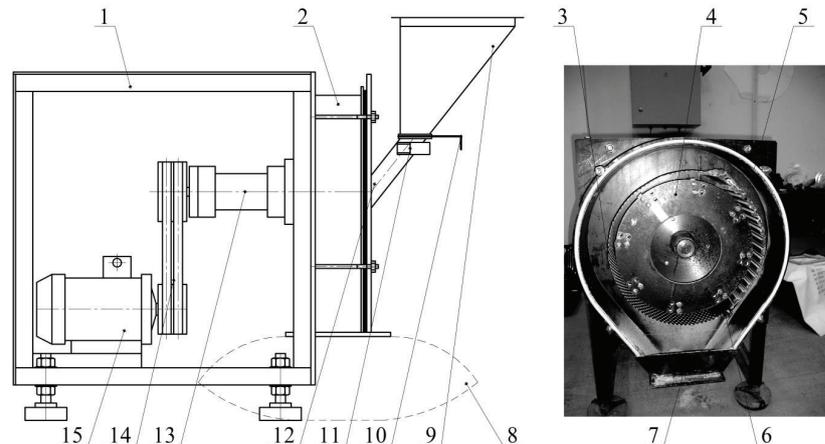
Feed grain crusher: 1 – bed; 2 – work chamber; 3 – sieve; 4 – rotor; 5 – deck; 6 – bracket; 7 – unloading neck; 8 – filter bag; 9 – bunker; 10 – adjustable flap; 11 – hole with a gate; 12 – loading neck; 13 – bearing case; 14 – V-belt transmission; 15 – electric motor
